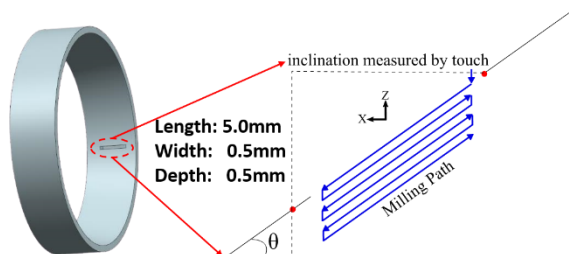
Tool path of milling spalling on thrust bearing outer raceway. The two red points are touch points to measure the inclination angle θ .
